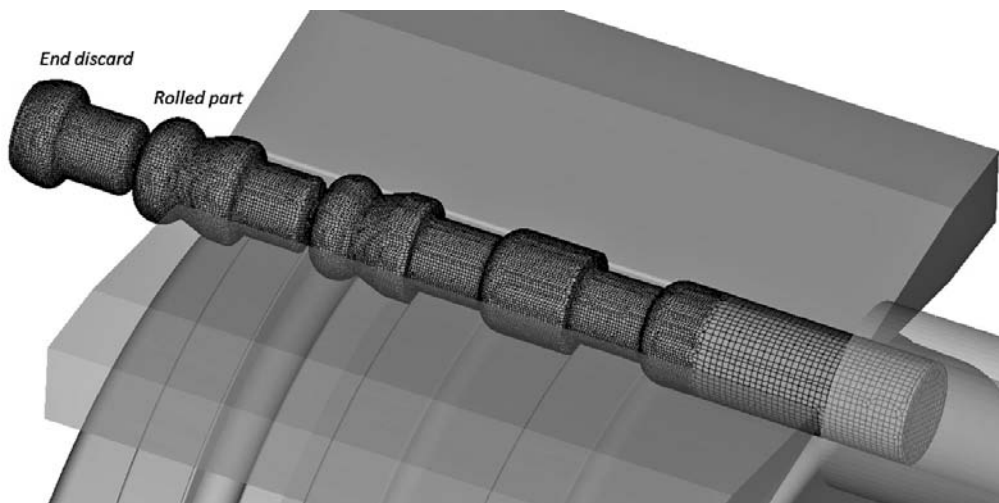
Workpiece shape after five rotations of the helical rolls; division into elements is shown
